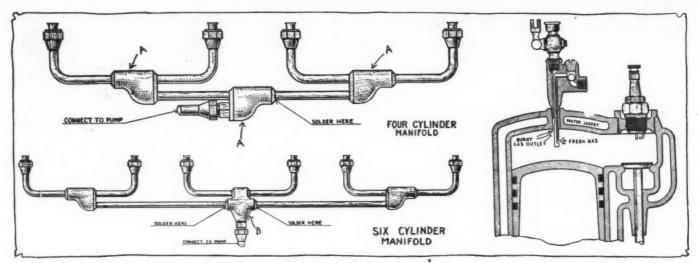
Starting manifolds used in installing the Shur-Go gasoline apparatus; section through check valve
